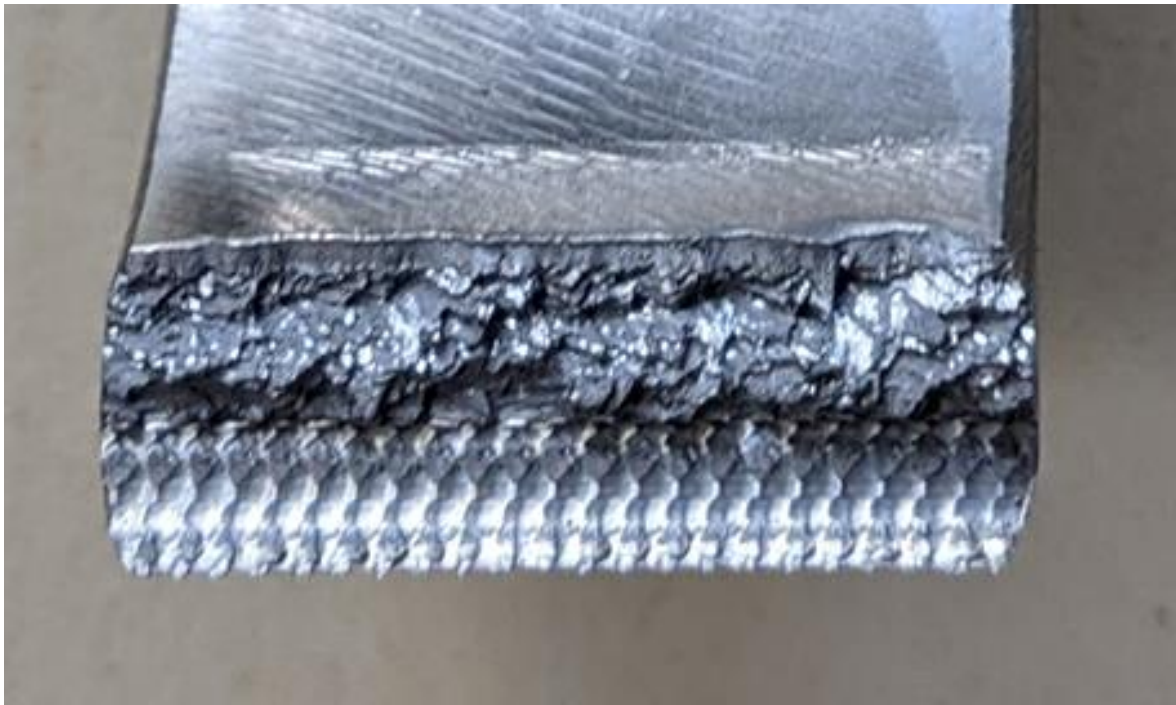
Failure surface of a defective friction stir weld showing cold lapping in the lower region
